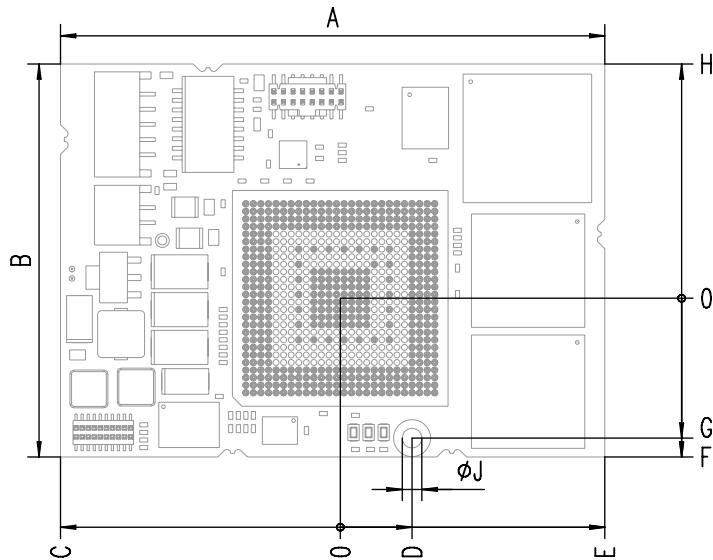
ETK-T2.1A and ETK-T2.1B Dimensions - Top View
